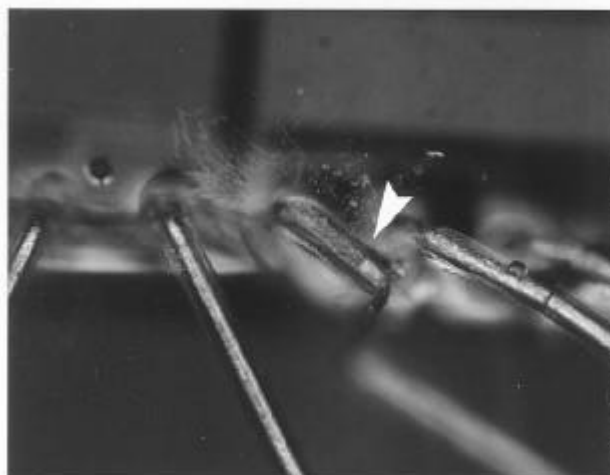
Photograph of a Broken Wire Bond on a Silicone Coated Die
